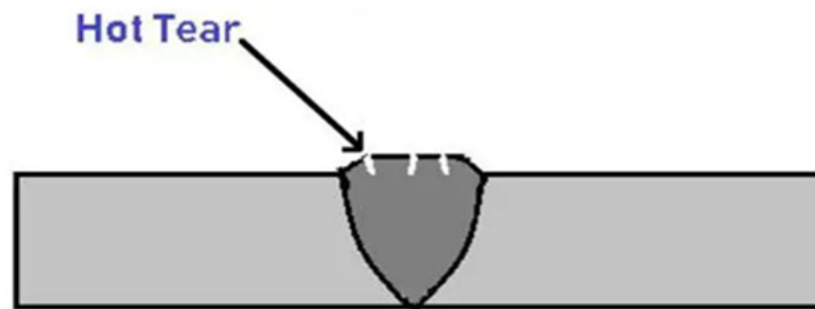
Representing the Hot Tear in Welding [The Engineers Post].
